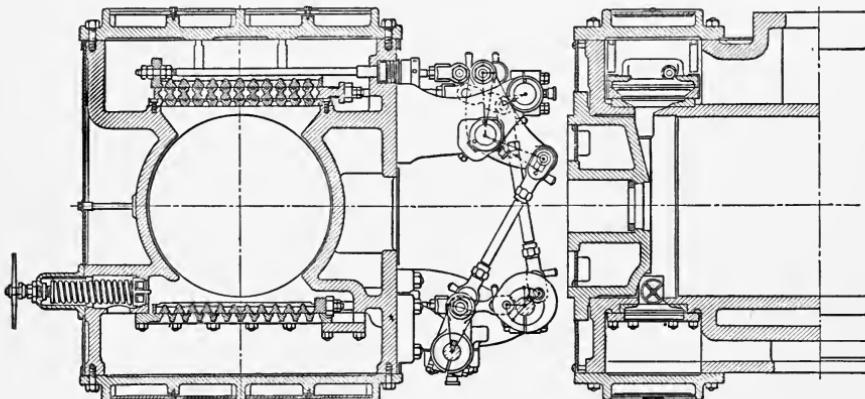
Valve Mechanism of the McIntosh & Seymour Engine.
